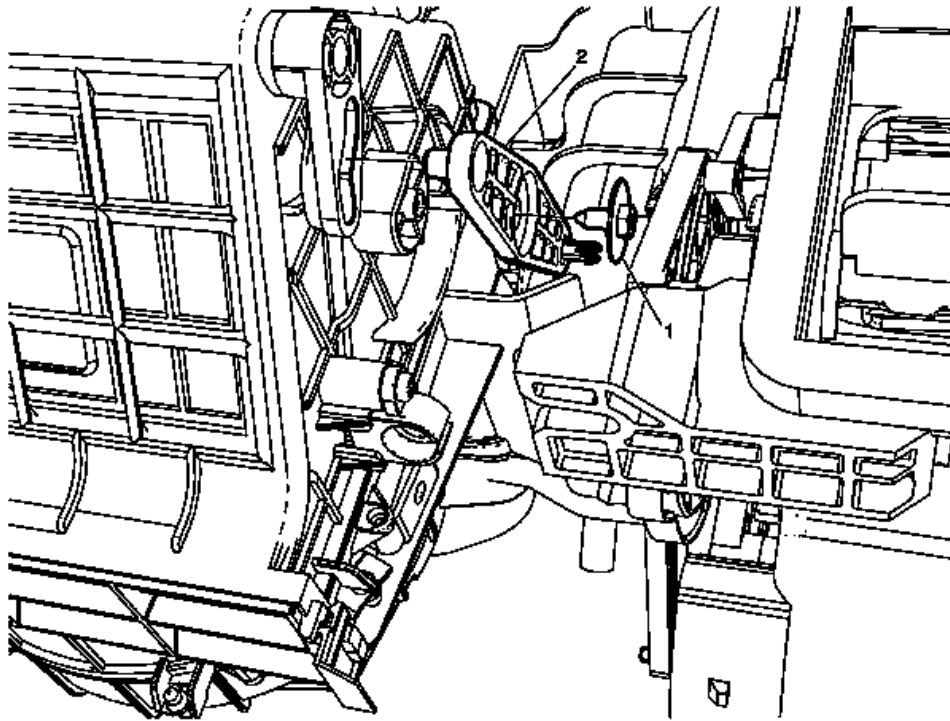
Air Inlet Valve Link (Right Hand Drive)
